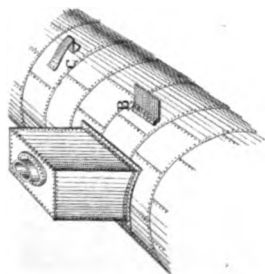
Cornish Boiler exploded from corrosion at bottom.
